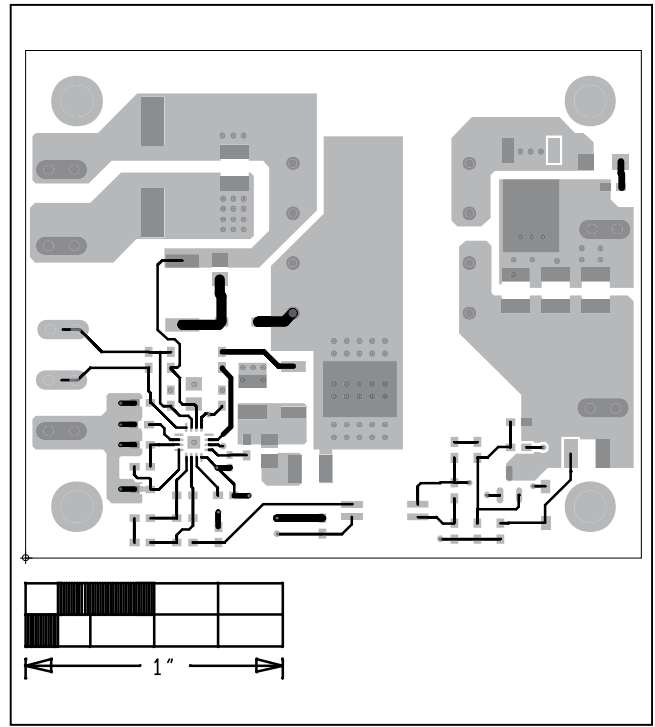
MAX17596 EV Kit PCB Layout—Component Side
